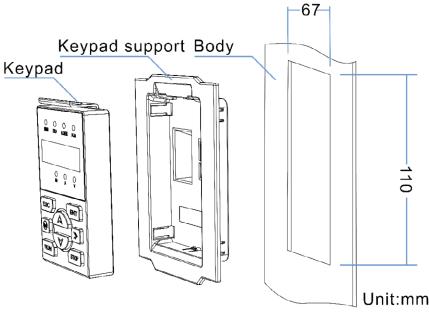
Keypad support installation diagram and control cabinet processing dimensions
